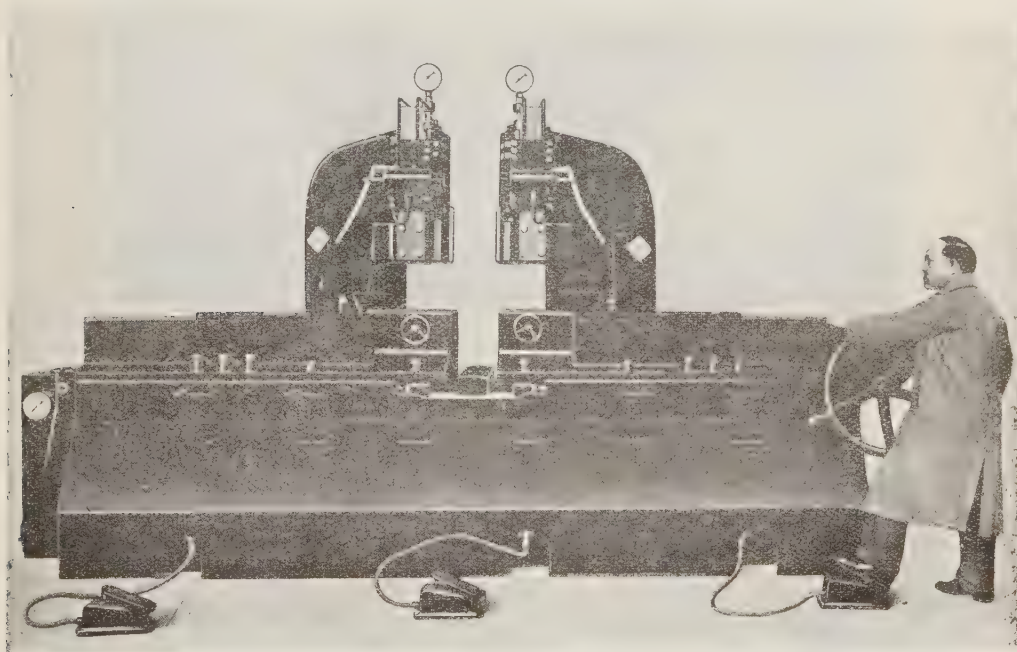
Semi-automatic electric flash welding machine.
